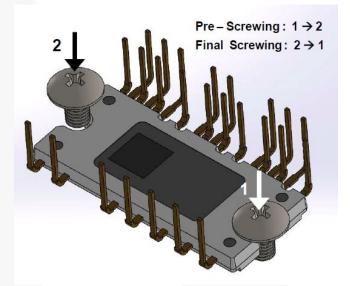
Mounting Screws Fastening Order: Pre-Screwing: 1 → 2; Final Screwing: 2 → 1
